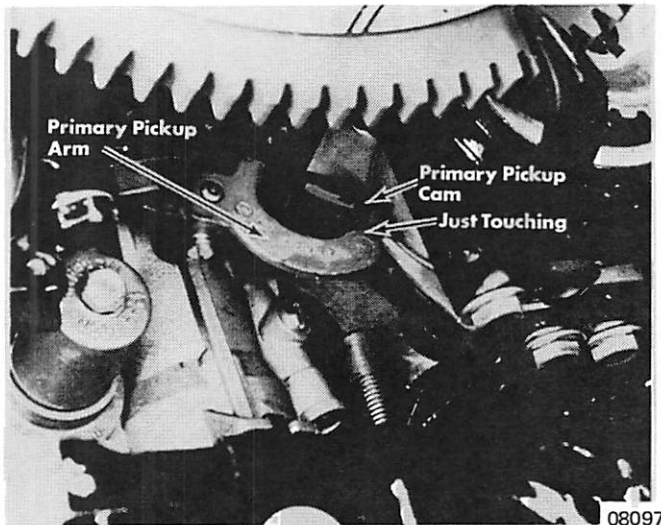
Primary Pickup Cam Just Touching Carburetor Primary Lever
